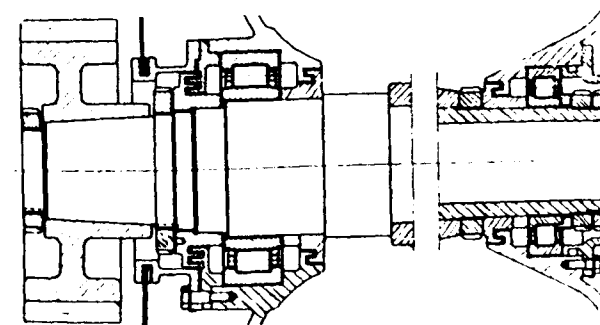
Traction motor equipped with cylindrical roller bearings.
